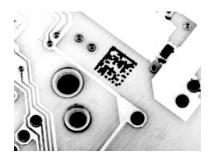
Data Matrix Code Directly Marked on PCB Surface by Using Laser Etching
